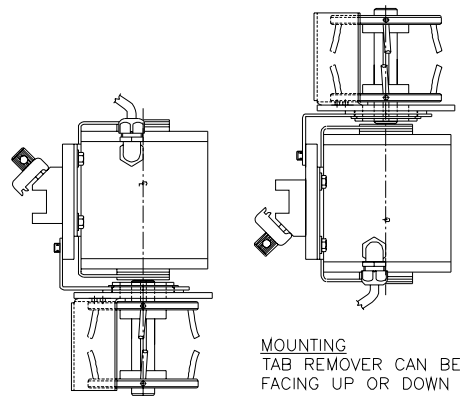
Motor Up Mounting vs Motor Down Mounting
